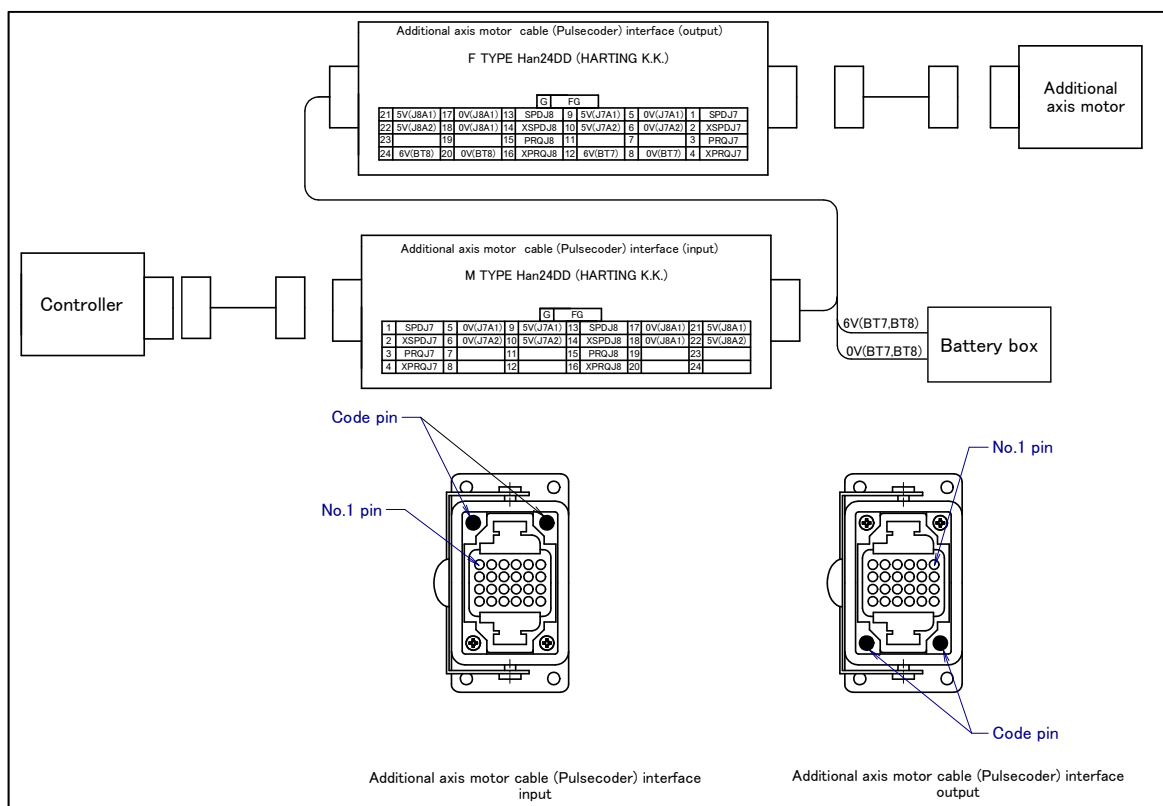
(I) Pin layout of the additional axis motor cable (Pulsecoder) (ARP) interface and layout position of the code pin (option)
